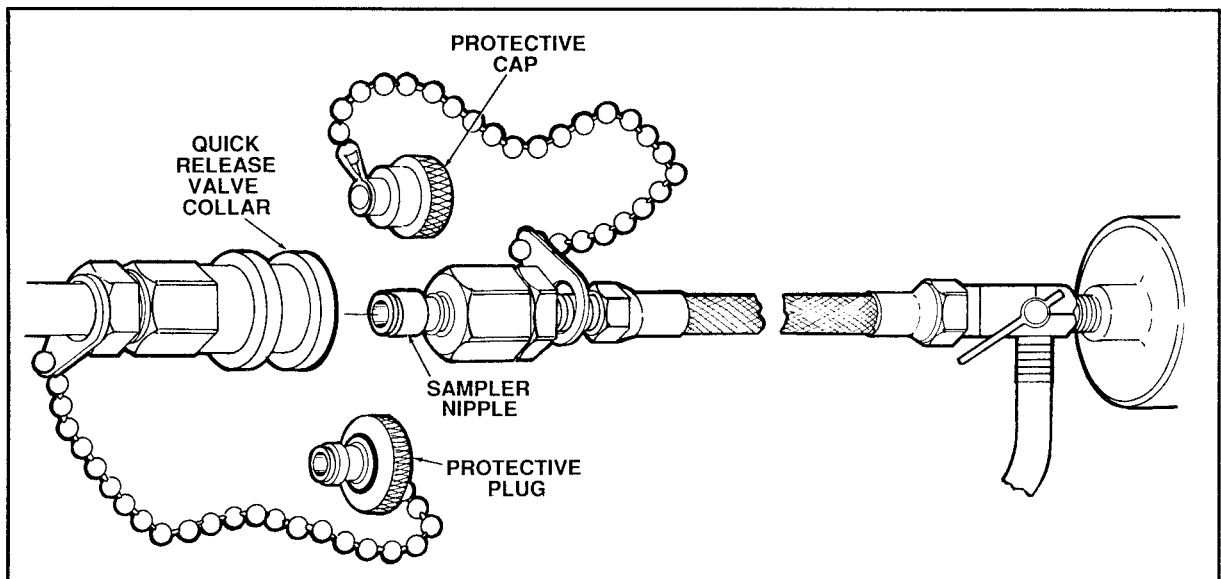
Removing Sampler Protective Cap from Quick-Release Valve Plug
